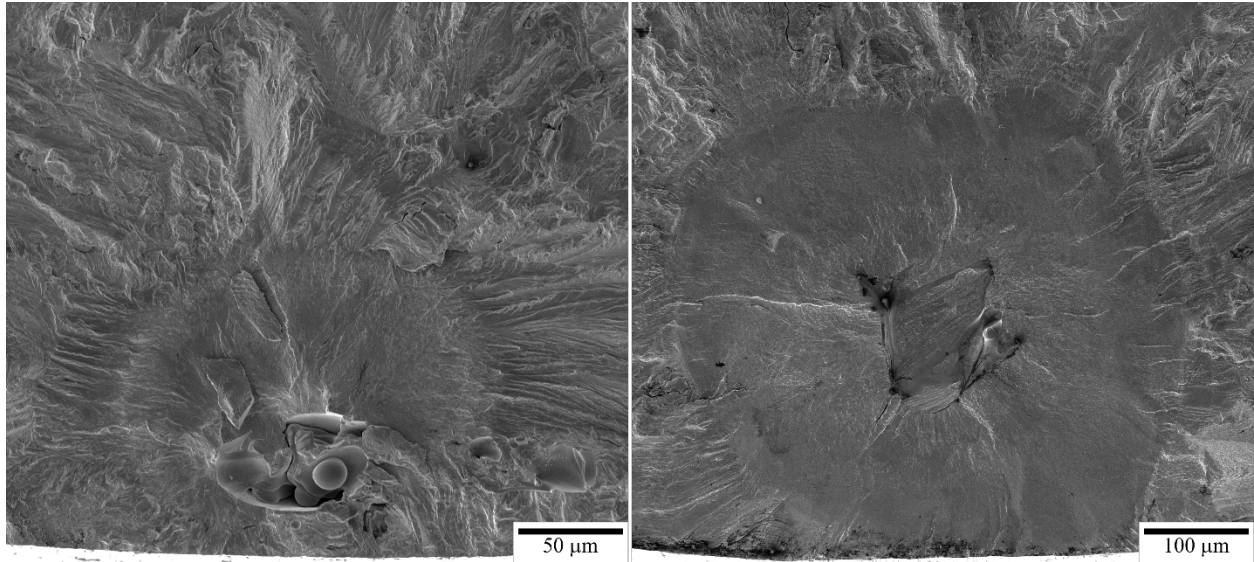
Representative initiating defects seen in (left) surface-removed CL M2 (CCV-su) specimens and (right) contour-removed CL M2 (CCV-cu) specimens. Both specimens show the formation of a fish-eye on the fracture surface, indicative of crack growth in vacuum.
